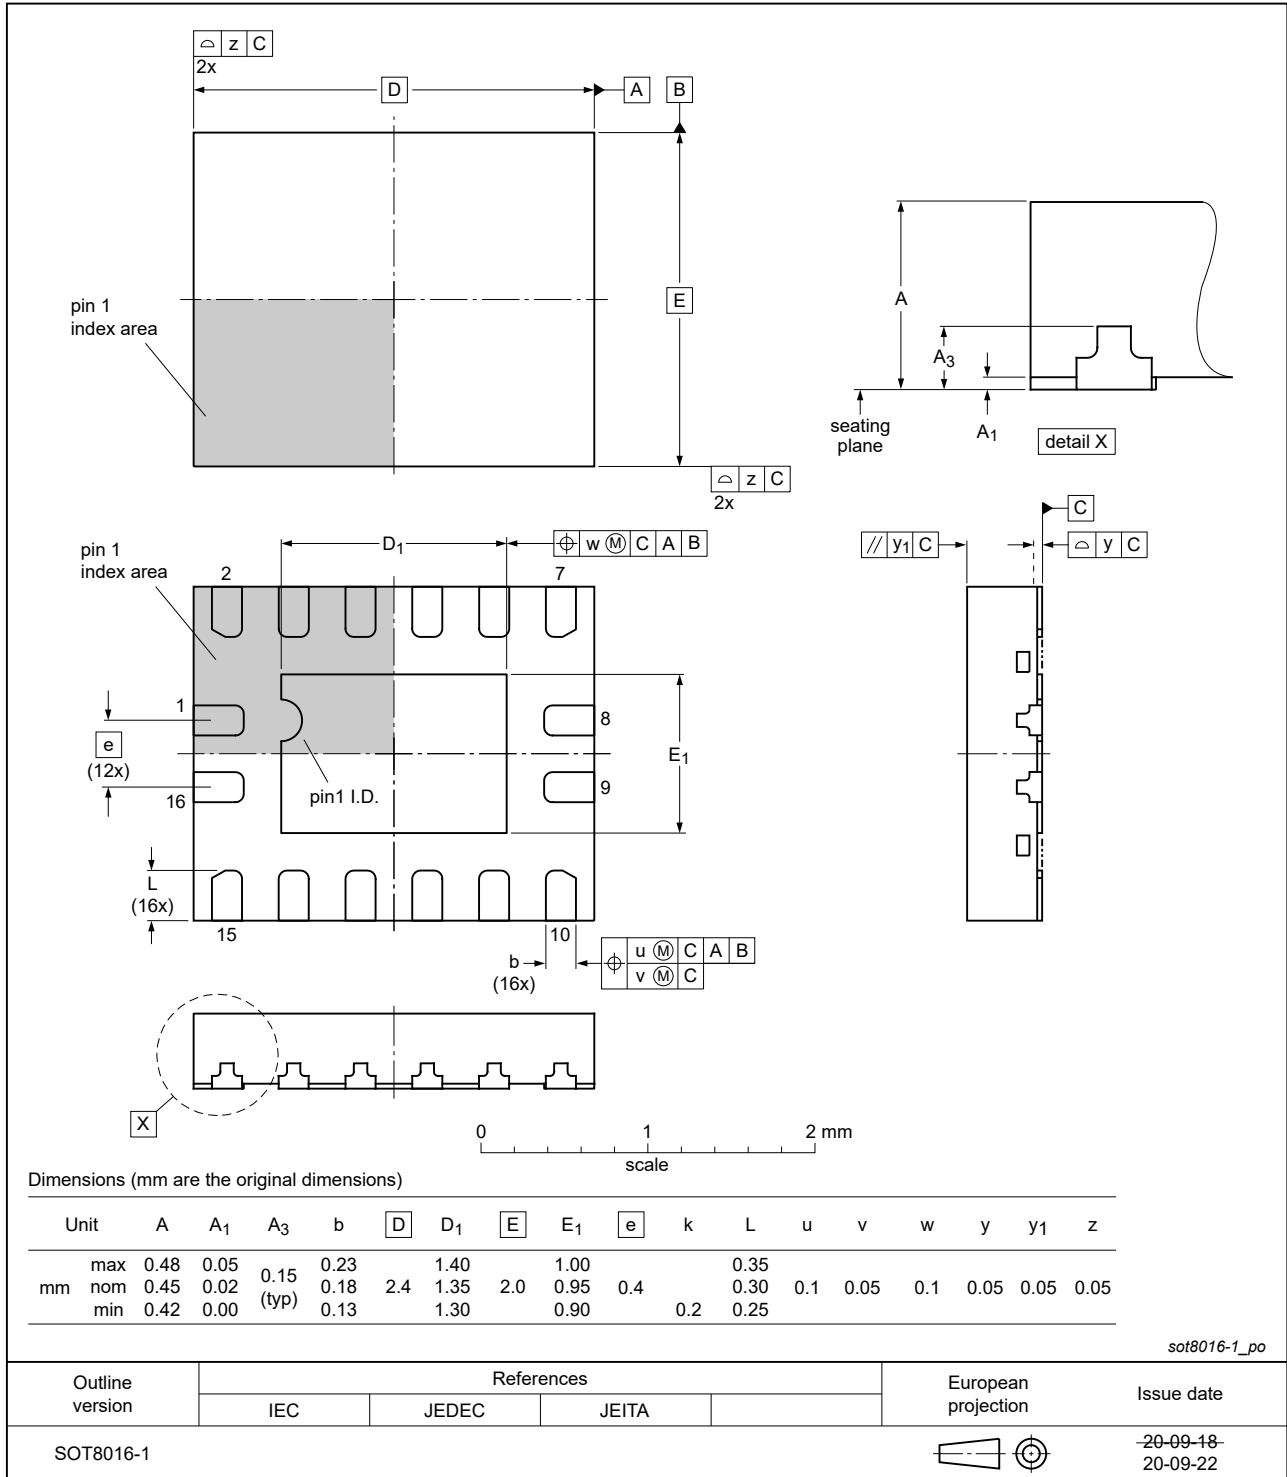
Package outline SOT8016-1 (DHXQFN16)
